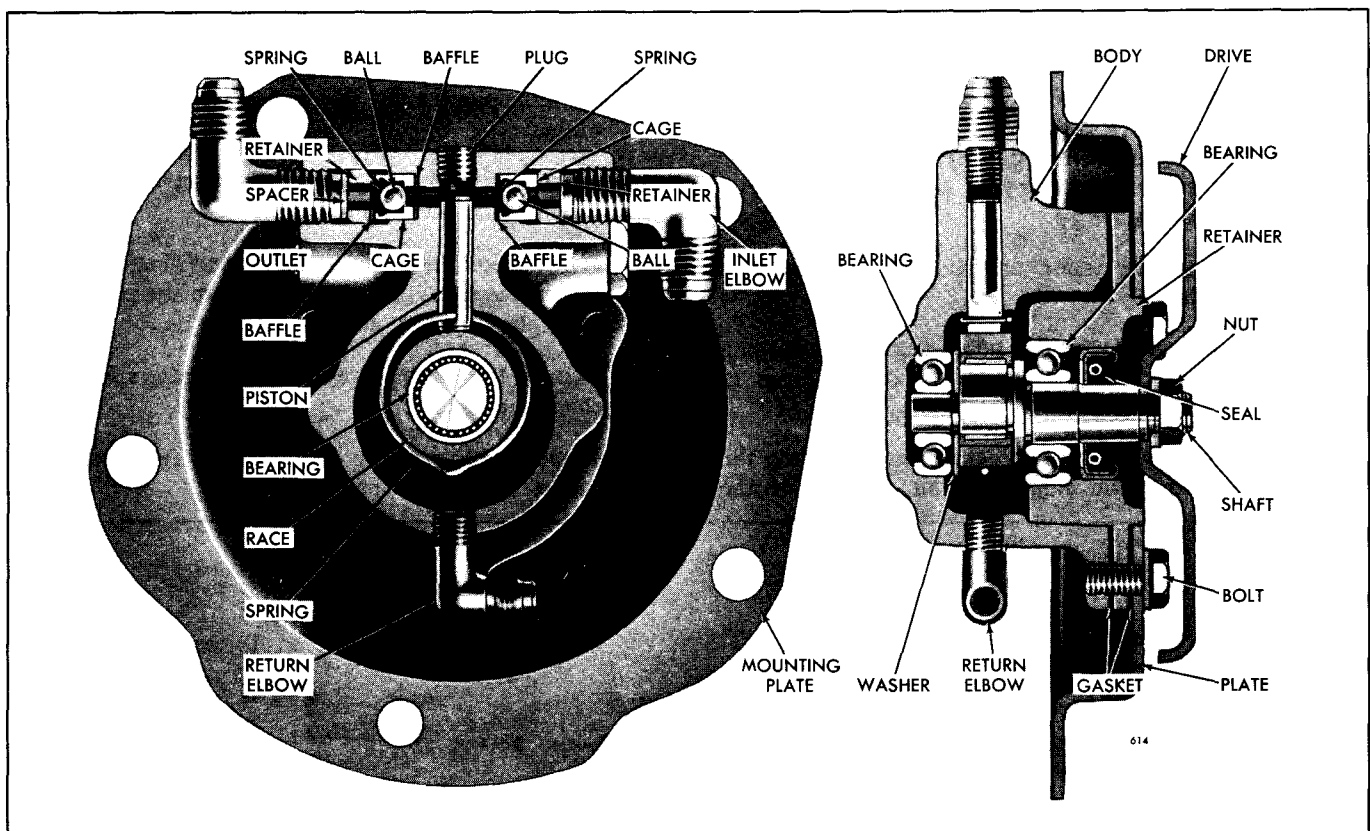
Direct Engine-Driven Hydrostarter Charging Pump
